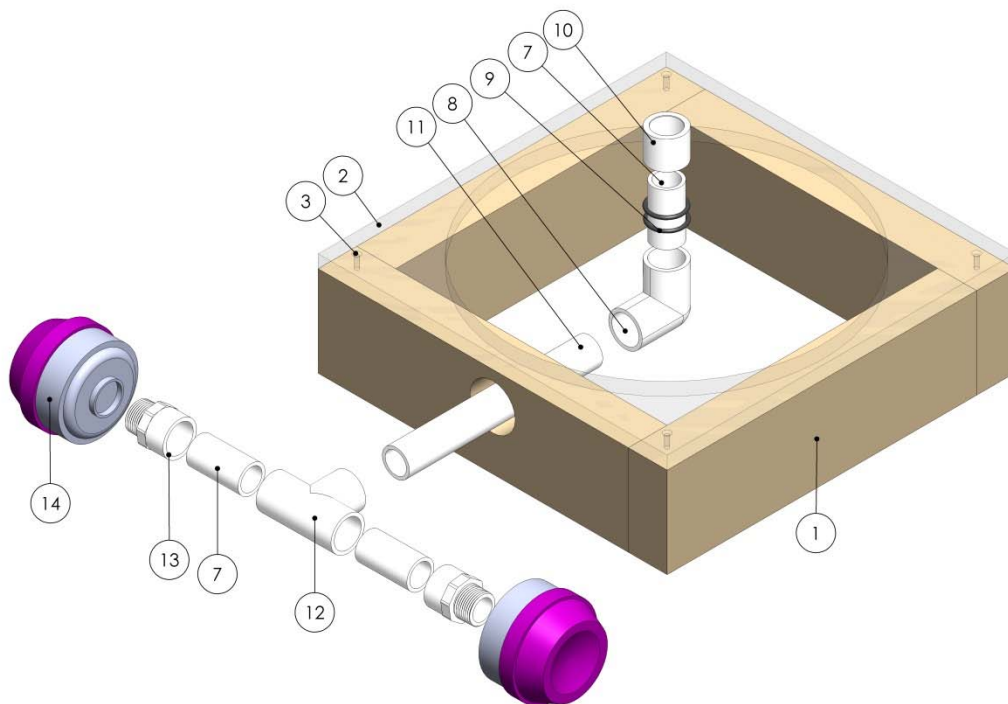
Environmental test chamber parts and assembly—base unit. (Graphic Credit: NIOSH)
